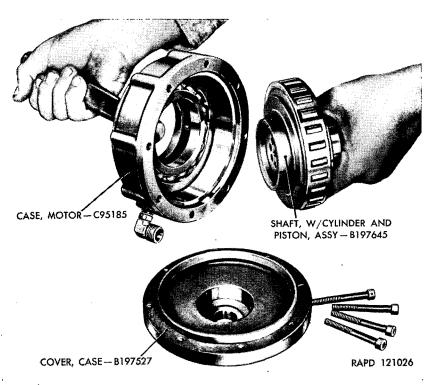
Removing hydraulic motor shaft, cylinder, pistons, and roller bearing.
